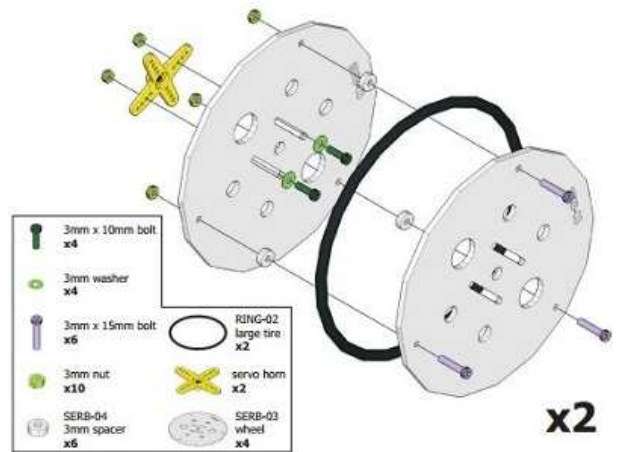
Wheel assembly Martínez, Montiel, and Valderrama (2016).
